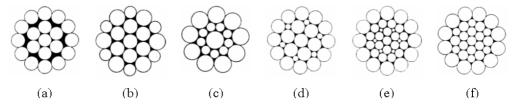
Common strand constructions used in stranded rope applications:(a) simple strand (12/6/1) cross-lay, note the common wire size; (b) Warrington (6+6/6/1) equal-lay; (c) Seale (9/9/1) equal-lay; (d) Filler wire (12/6+6F/1) equal-lay; (e) Filler-Seale (12/12/6+6F/6/1) equal-lay; and, (f) Warrington-Seale (12/6+6/6/1) equal-lay [20].
